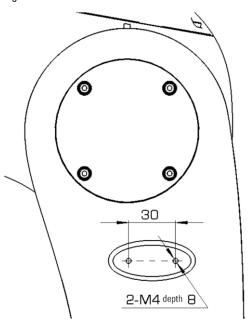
Dimension drawing of AIR8-710B upper arm interface
